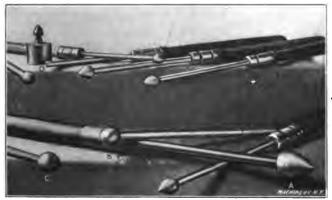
Metal Spinning Tools with High-speed Steel Removable Heads
